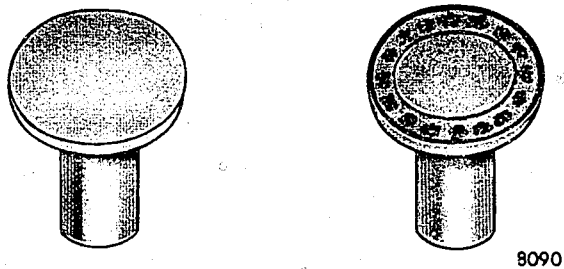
NEW AND WORN VALVE SEATING SURFACES
